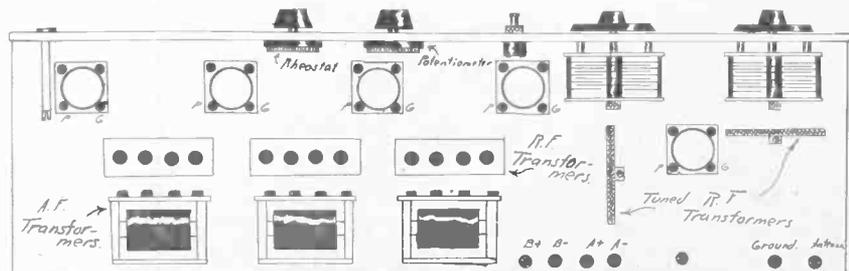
The assembly plan. "This arrangement should be followed closely," advises Mr. Caldwell, "as it has much to do with the results obtained." The diagram shows top view, with the panel in back.
